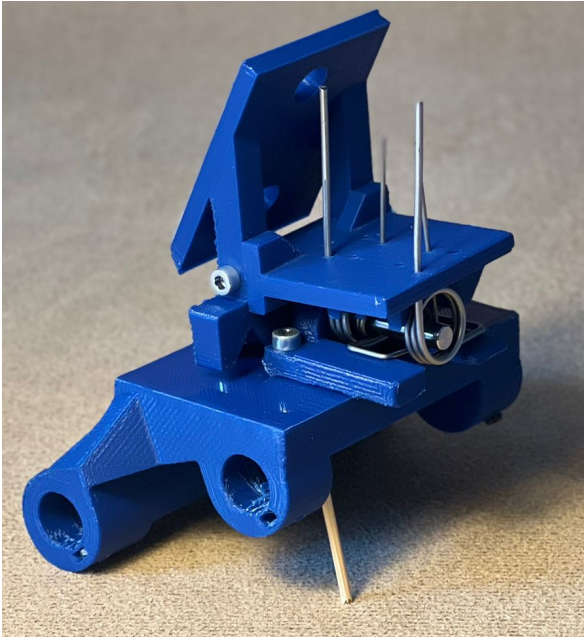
3D view of the 3D printed prototype. The toothpick is used to raise the front height to match de CAD views in section 3.4.
